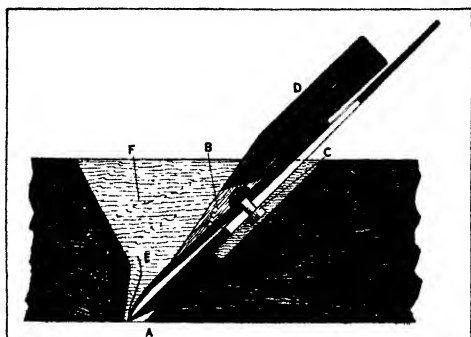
SECTION THROUGH PLANE. (A) CUTTING IRON. (B) BACK IRON. (C) CLAMPING SCREW. (D) WEDGE. (E) BROKEN SHAVING. (F) MOUTH.
